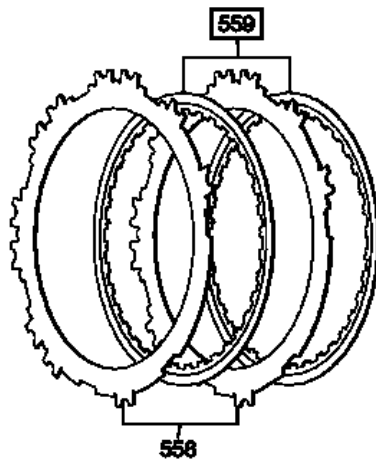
1-2-3-4 Plate Assembly (Gen 2) 24260699
